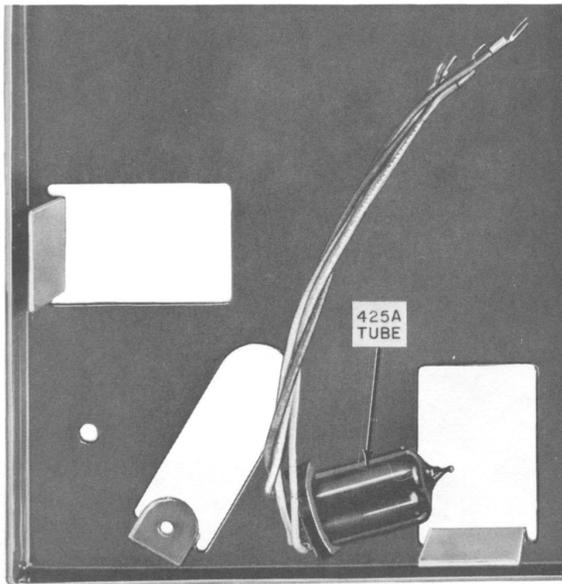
Installation of Cold-Cathode Tube on Base Pan Assembly
